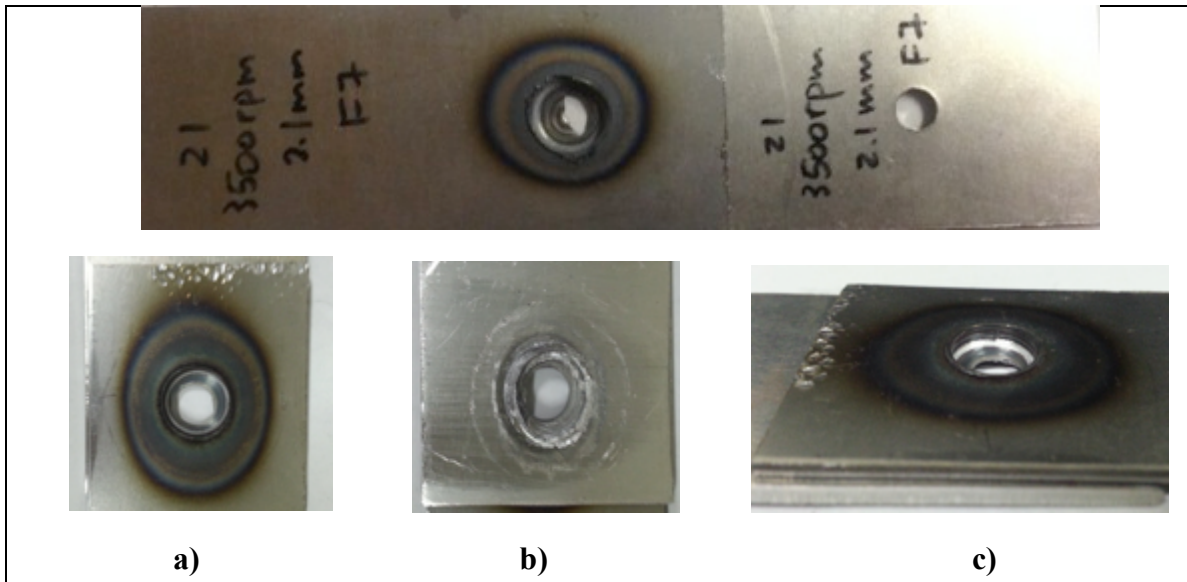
Photograph of the joint formed a) top view [steel side], b) bottom view [aluminum side], c) side view
